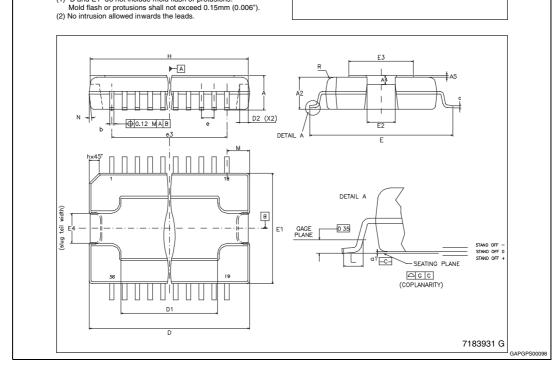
PowerSO36 (slug up) mechanical data and package dimensions
